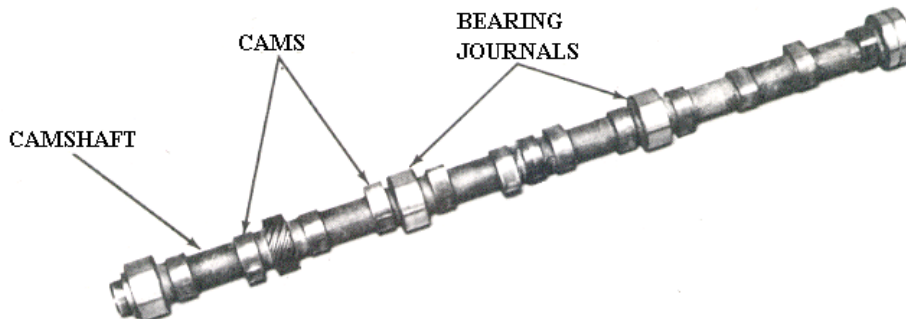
Typical camshaft in an internal combustion engine with camshaft parts named
